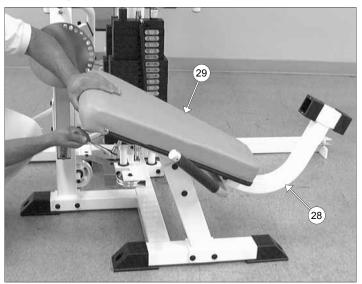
Attach Leg Extension Seat Pad (#29) to the Leg Extension Seat Frame (#28) using four Hex Head Cap Screws 3/8-16 X 1 1/4 (#96), and four Flat Washers SAE 3/8" (#93).
